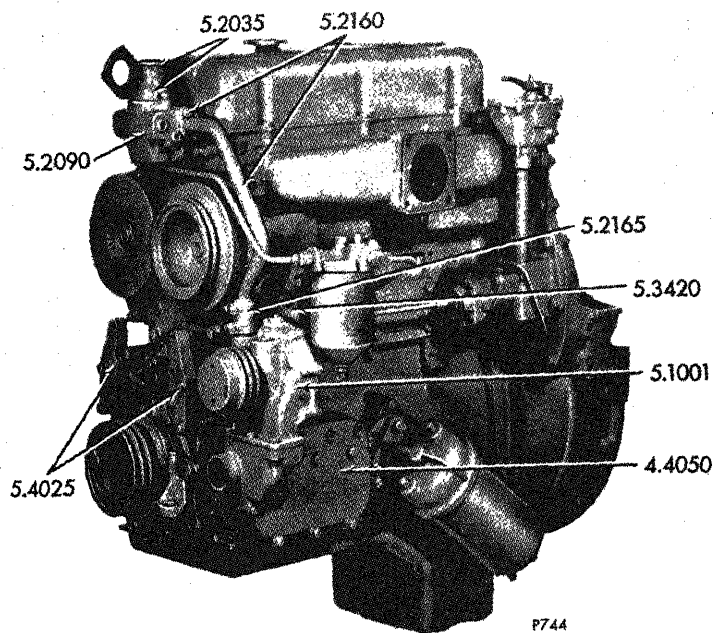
A TYPICAL COOLING SYSTEM (Inline Engines)
